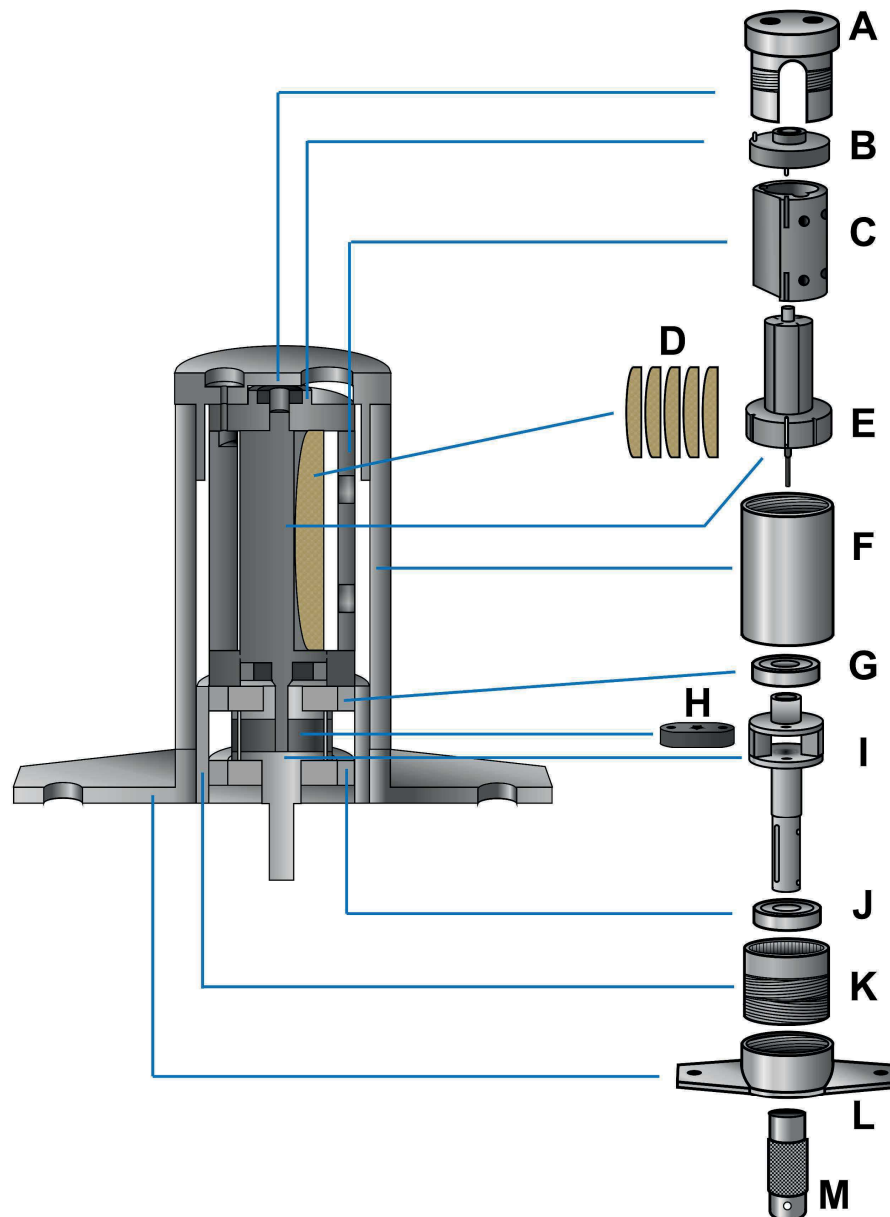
Cross section of the assembled motor unit and explosion drawing. In the explosion drawing all the parts are in the correct order for assembly. The motor unit consists of lid (B), stator (C), vanes (D) and rotor (E). The rounded site of the vanes is oriented towards the centre of the rotor. The rotor is connected to a shaft (I) *via* an aglet (H). To ensure smooth rotation of the shaft, two identical ball bearings (G and J) hold it inside the housing that consists of a lid (A), a housing (F) and a bottom part (K, L). Mounting the adapter (M) to the shaft (I) allows for connection to the rotor of the Shear Force Mixer. Note that all threads in the motor are left-handed threads.
